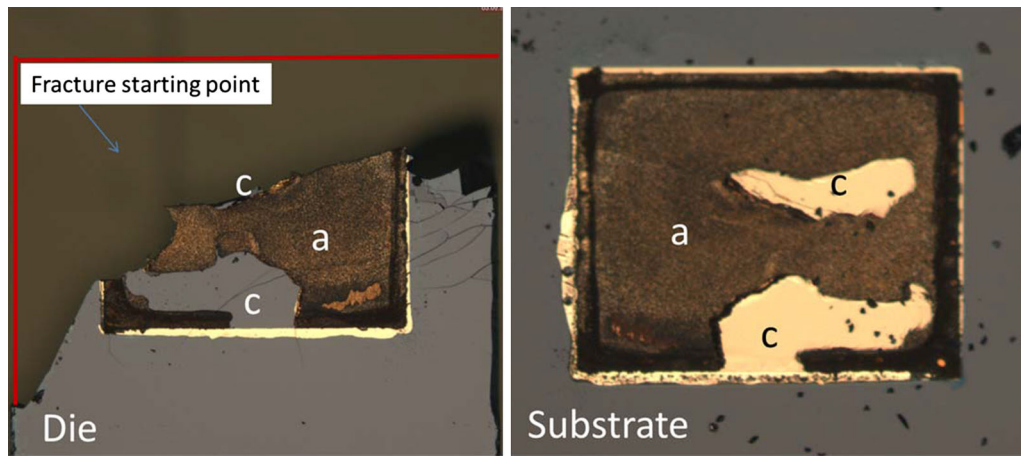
Typical fracture of the die during shear test. The fracture originates from one of the corners of the die where Si is broken. For this particular sample, two different fracture modes are observed at the substrate side: interface fracture (*a*) and adhesive fracture at the Ti-W to Si interface (*c*).
